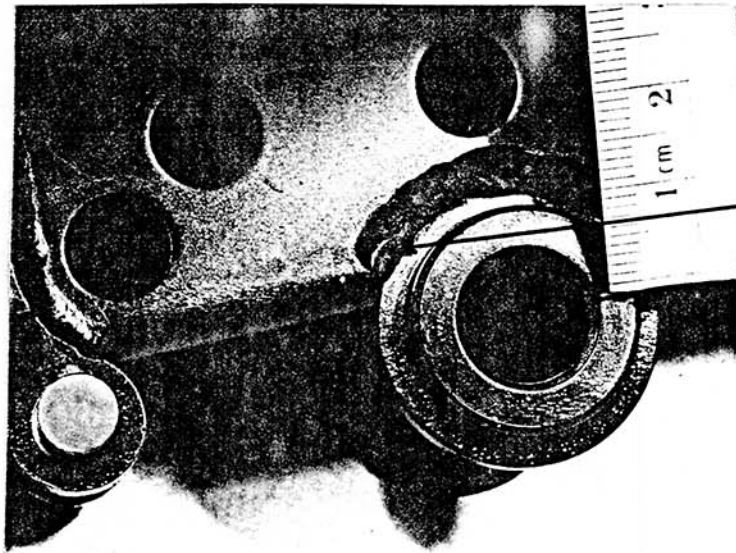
Receiver (reference Component No. 1), machine gun 5.56-mm, M249, SN 002305: magnetic particle crack pattern noted before firing showing 0.4-cm crack in weld (arrow) on M249, SN 002305, in the area of tripod mounting boss (left side).
